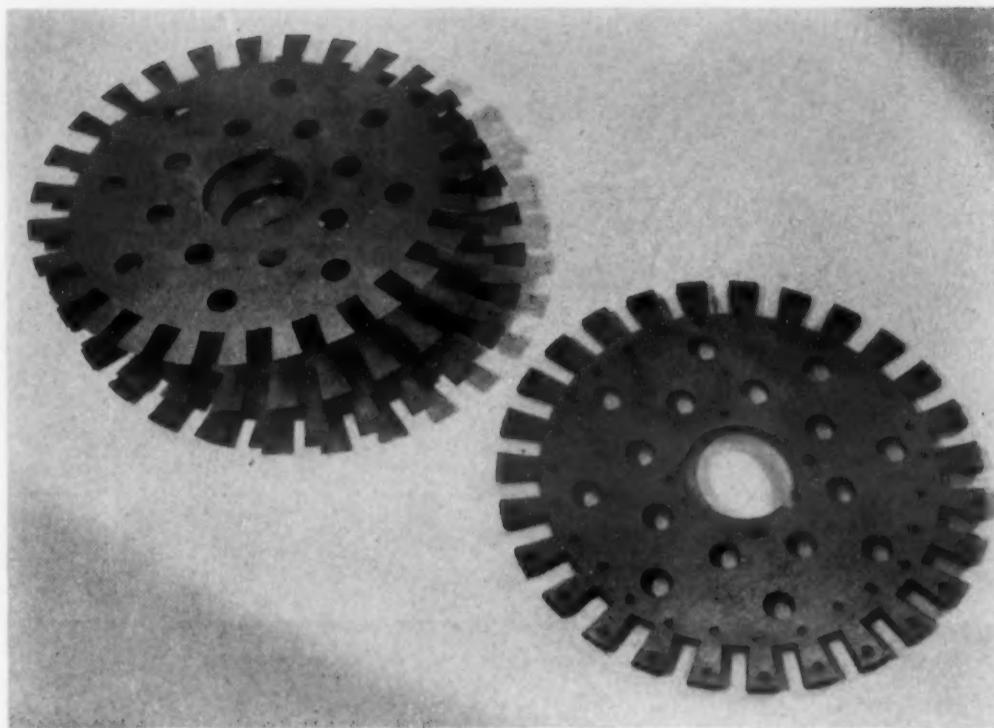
Nine thicknesses of 0.020-in. mild steel were formed and then spot welded to form this end plate which was formerly made of three 1/16-in. thicknesses welded together.
